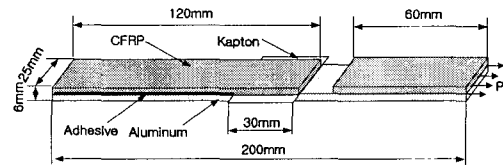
Configuration of aluminum/CFRP cracked lap shear specimen
